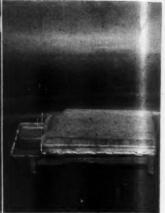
Aluminum alloy 108 castings, prior to fabrication by inertgas-shielded metal-arc welding.
